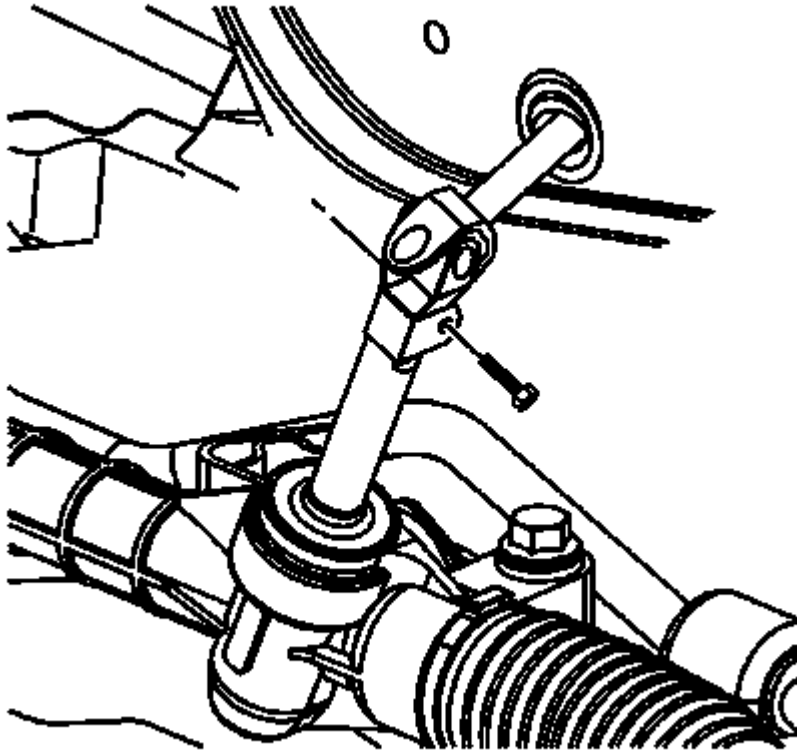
View Of Intermediate Shaft-To-Steering Gear Pinch Bolt
